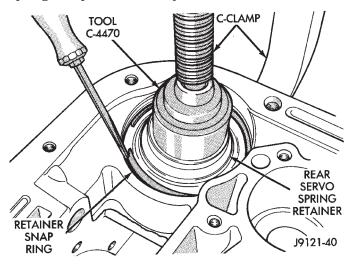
Removing Rear Servo Retaining Snap Ring—46RH
